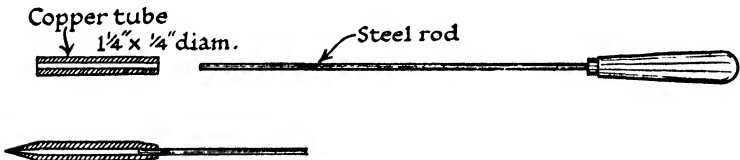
The construction of a small soldering iron for repairing moving coil galvanometer suspensions
